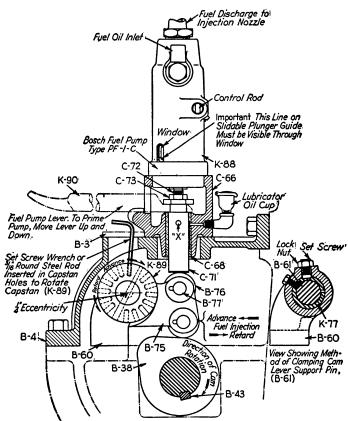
Chicago Pneumatic Fuel Pump Adjustment, Type RHB-50.
